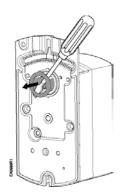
Removing 1/2-inch Ø shaft guide for 3/8-inch or 5/8-inch damper shaft.
